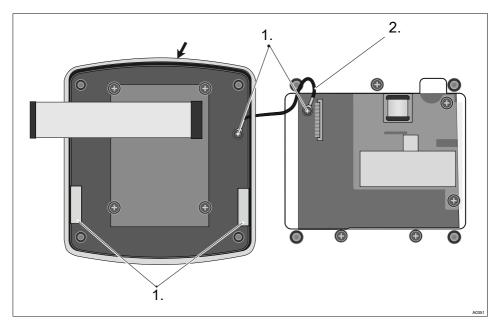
Fitting the profile seal onto the top section of the controller housing
